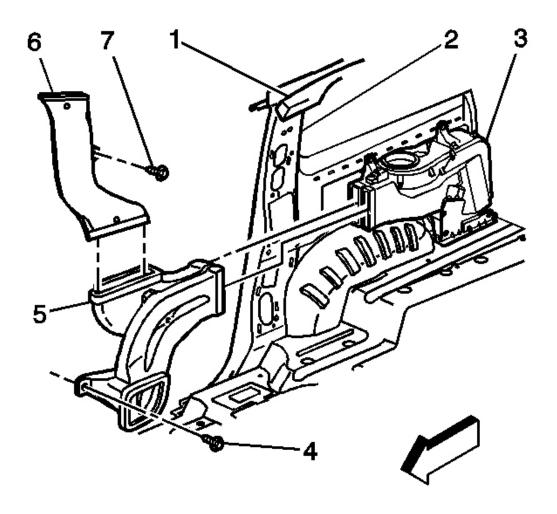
Removing/Installing Rear Ducting Courtesy of GENERAL MOTORS CORP.
